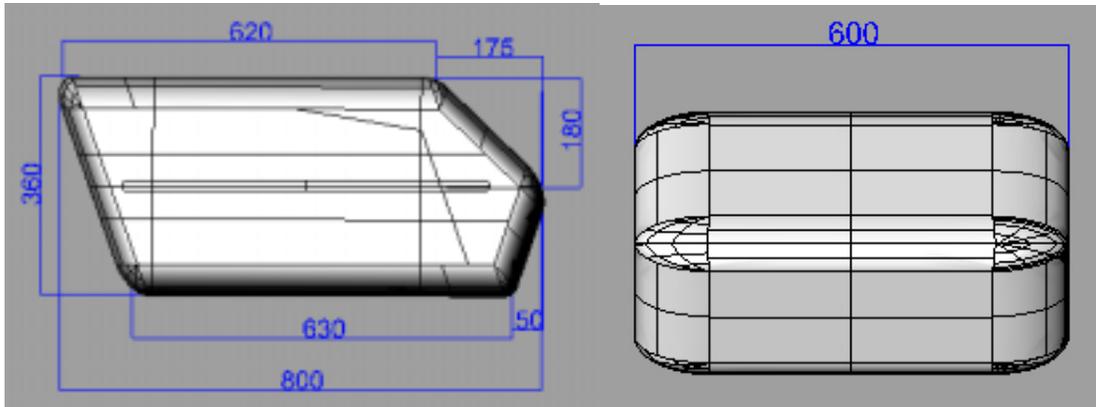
, (left) the dimensions of this box from the side shown in millimeters
